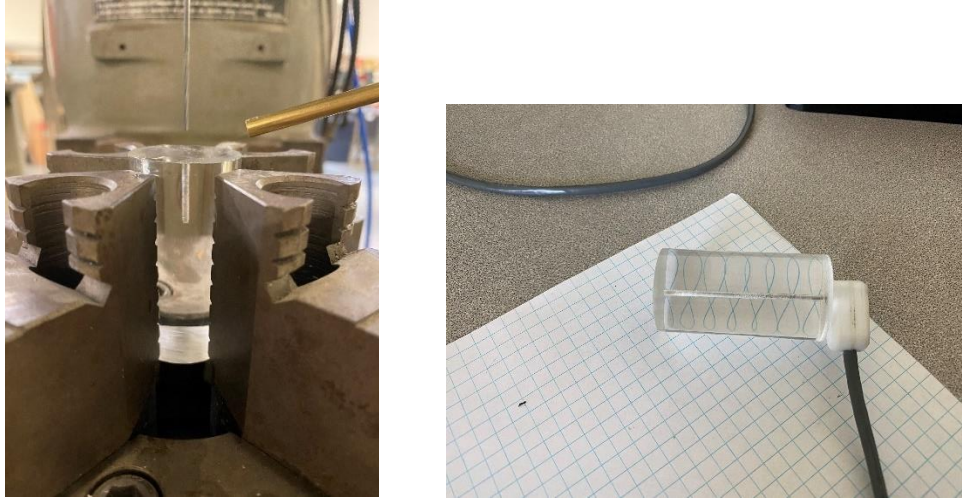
(a) Drilling hole into test sample (left) (b) sample during experimental testing (right).
